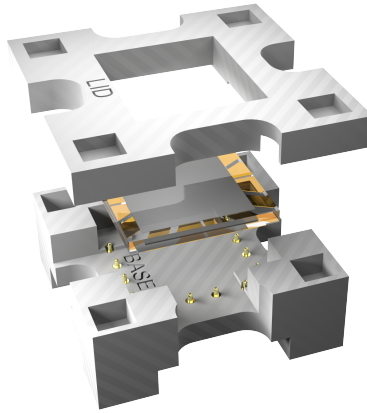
A 3D-rendered exploded view of the PSC holder system, demonstrating the arrangement of spring-loaded electrical contacts (pogo pins). This holder enables direct contacting of PSC electrodes, without etching or adding conductive pastes. Adapted from the publication VI SI under a CC BY 4.0 license.
